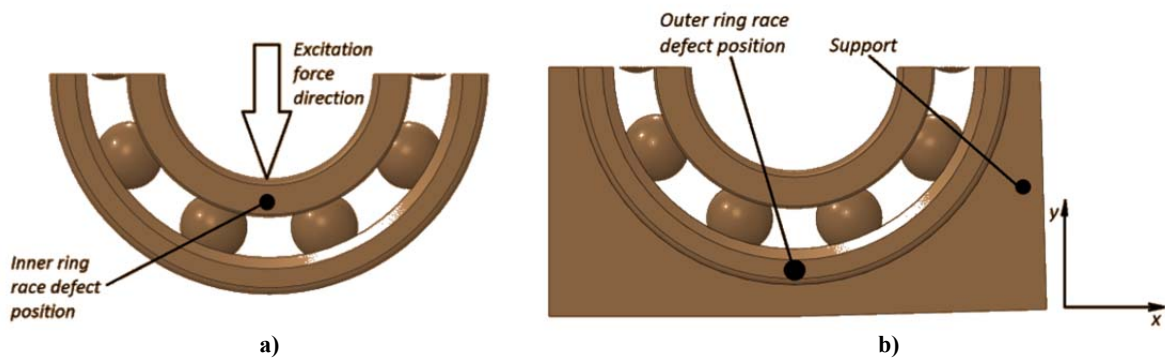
Initial conditions of measurements: a) position of inner ring race defect; b) position of outer ring race defect
